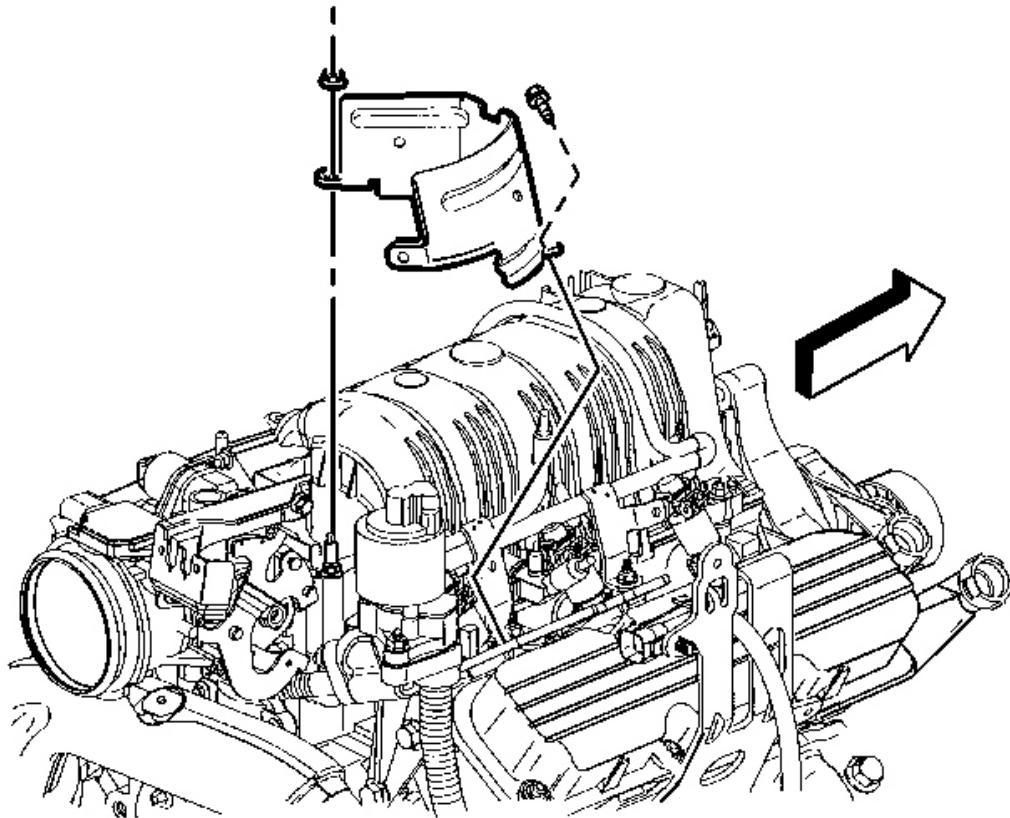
Identifying Fuel Injector Rail Bolts
